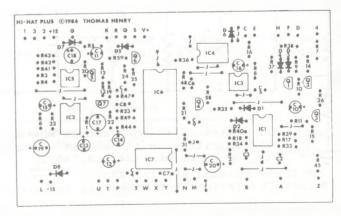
CIRCUIT BOARD COMPONENT LAYOUT
